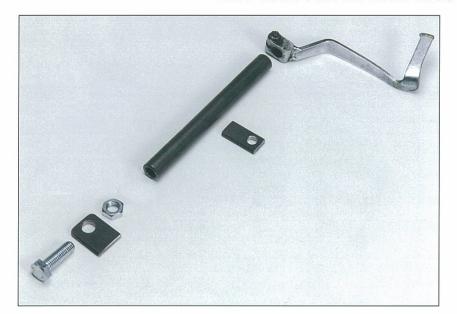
The parts required to make the gear-change shaft. (Steve Williams)
